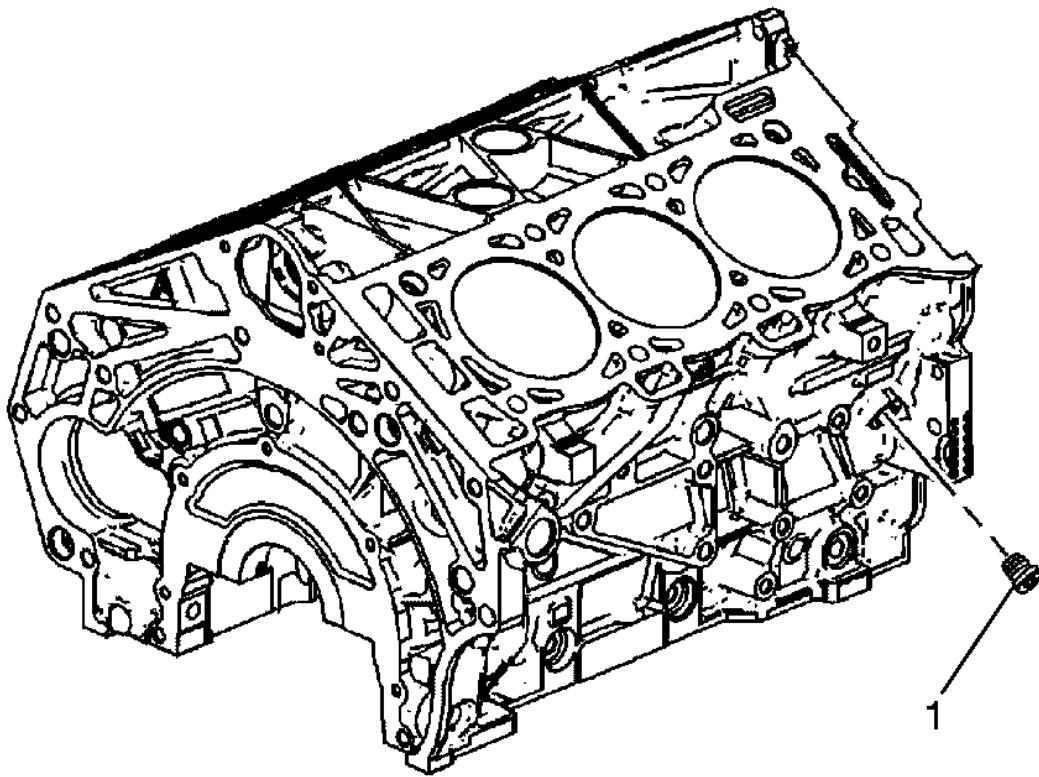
Identifying M14 Rear Oil Gallery Threaded Plug
